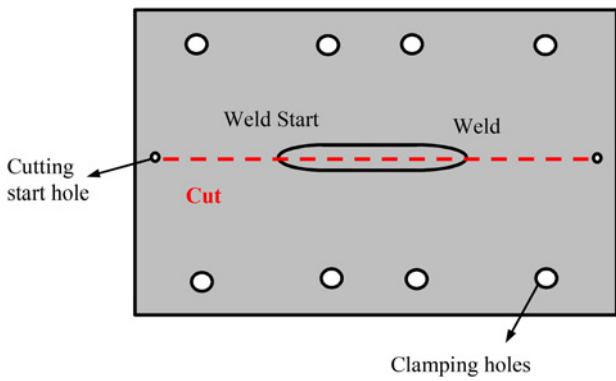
Schematic drawing of a 3-pass welded plate showing how an 'embedded crack' contour cut configuration can be created by introducing a cut start-hole in near the edge of the plate [20]
